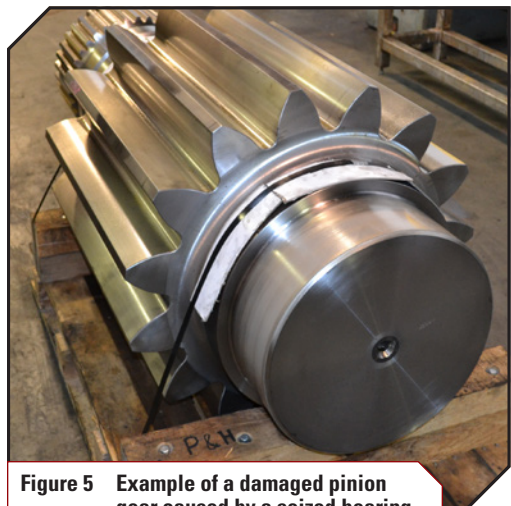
Example of a damaged pinion gear caused by a seized bearing which damaged the seat and also created a gouge during the removal of the bearing.
